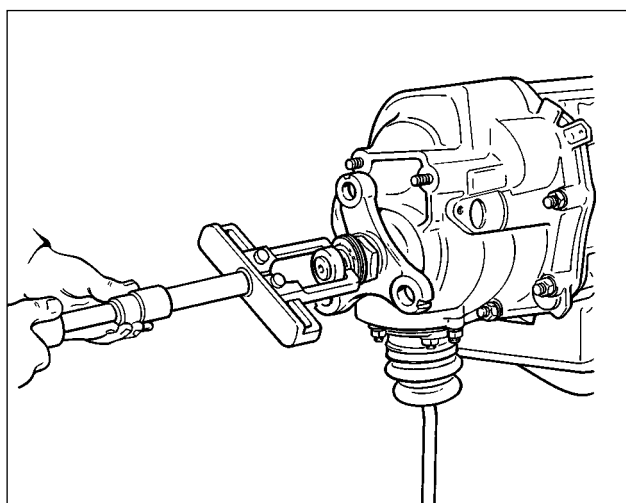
Removing the coupling centering ring from the propeller shaft
